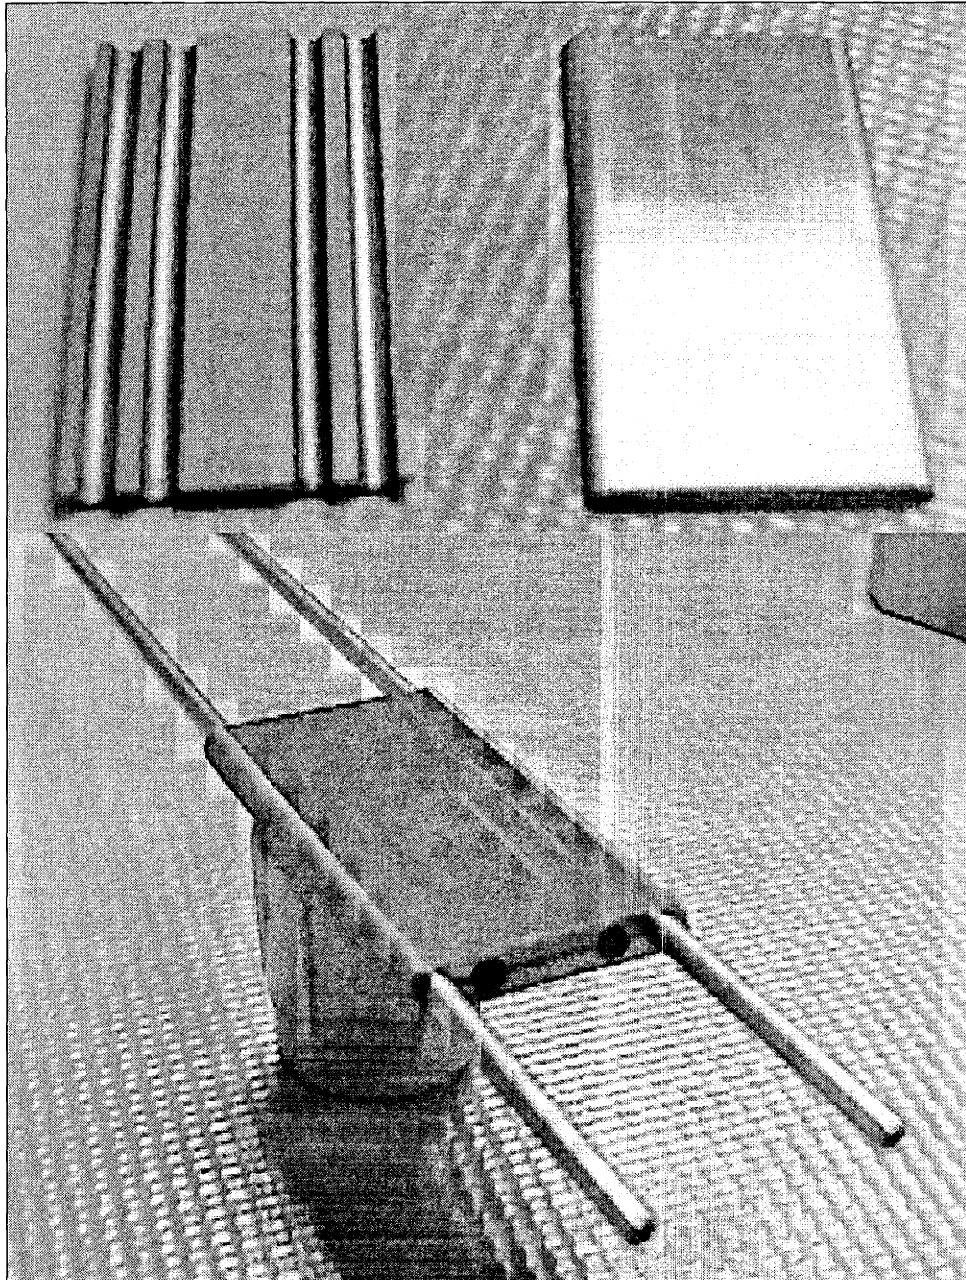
Clam shell heater used for the product transfer lines from the DieMate™ manifold to the front of the board.
